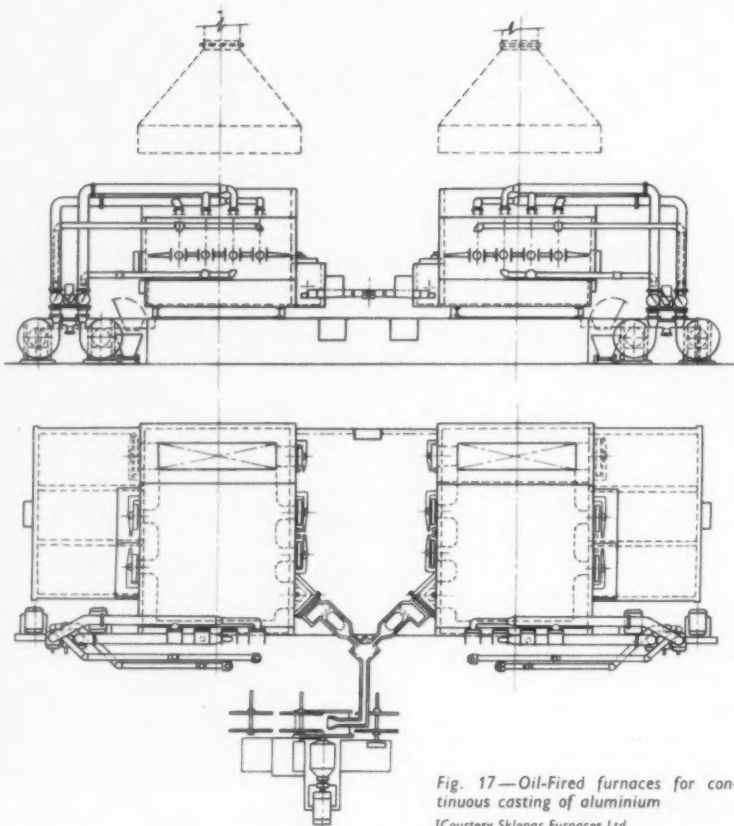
Oil-Fired furnaces for continuous casting of aluminium
